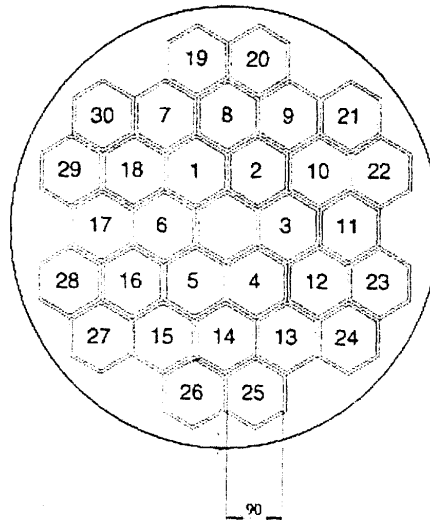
Drawing of the innerbasket showing dimensions and bundles positions
